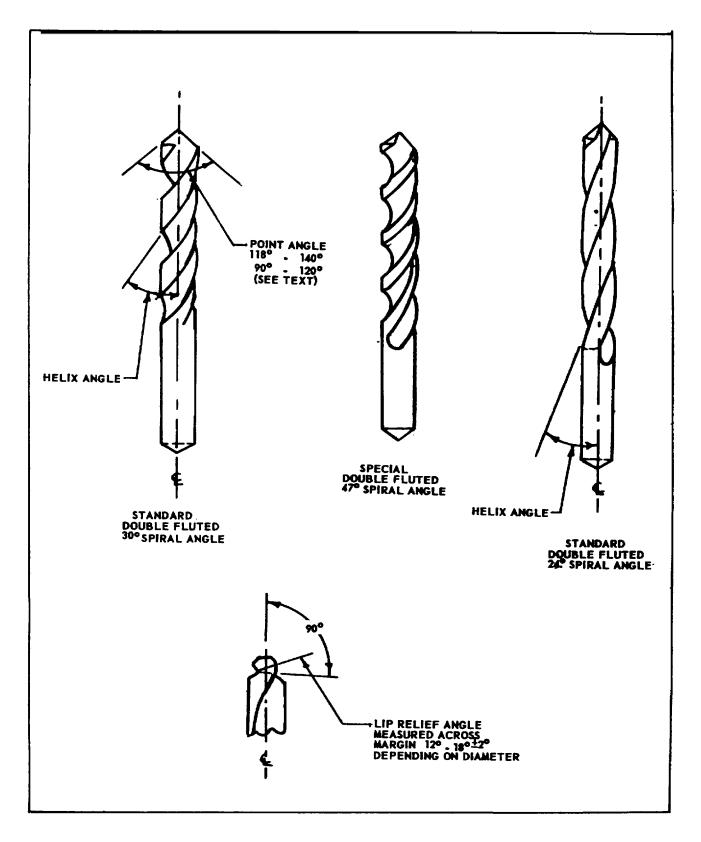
Drill Designs and Recommended Cutting Angles.
